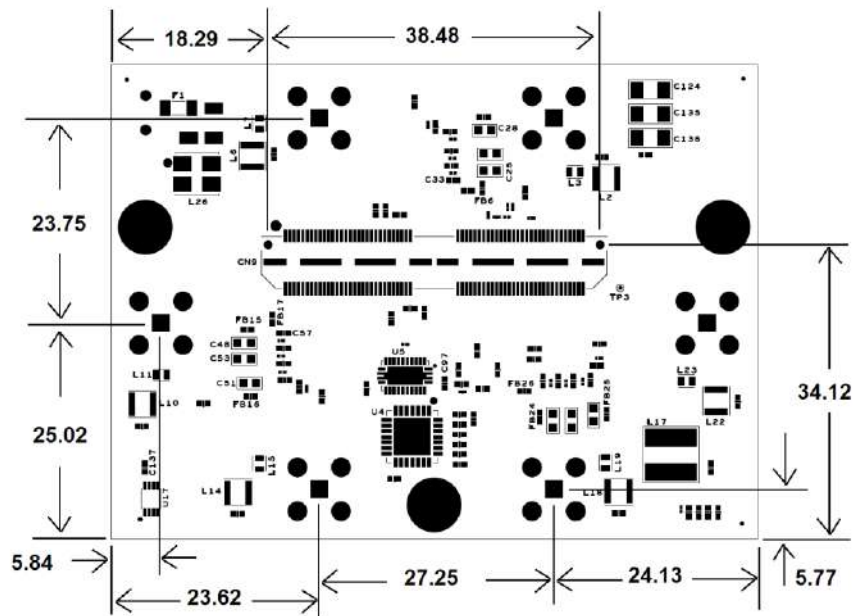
NileCAM21\_CUXVR Deserializer Board Rear View
